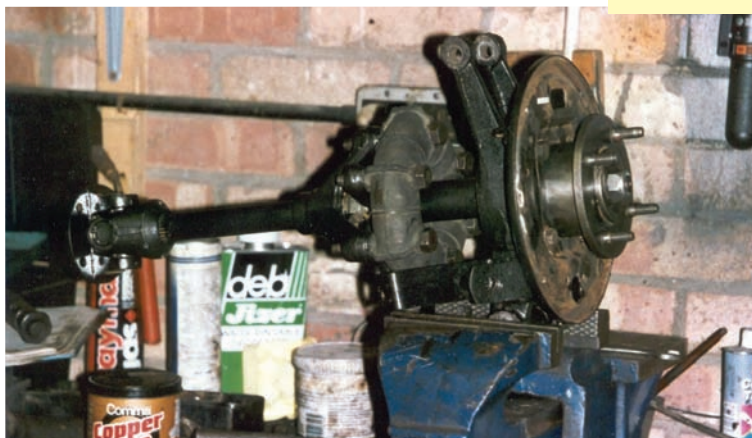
Mk2/early MK3 Rotoflex suspension layout
